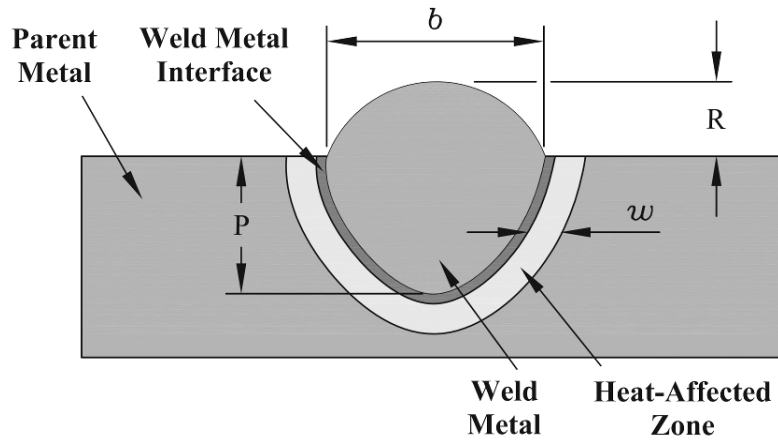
Zones of the welded joint and weld geometry parameters.
